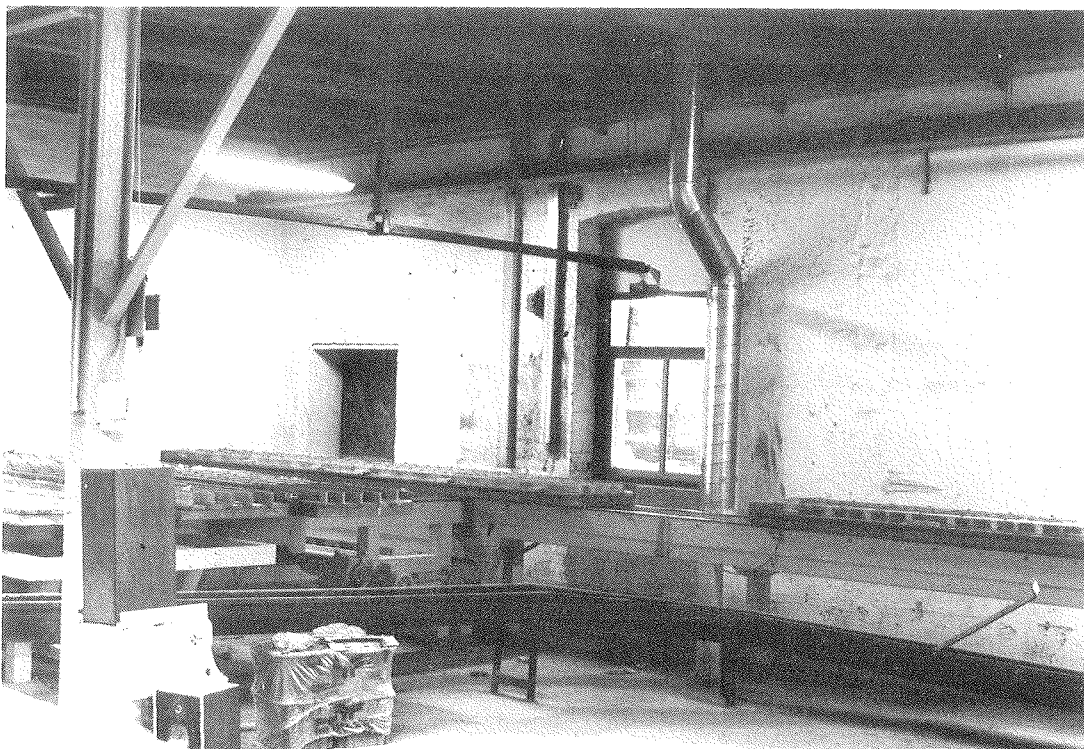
Room 2 with the semi-automatic systems for handling the brick beams.
